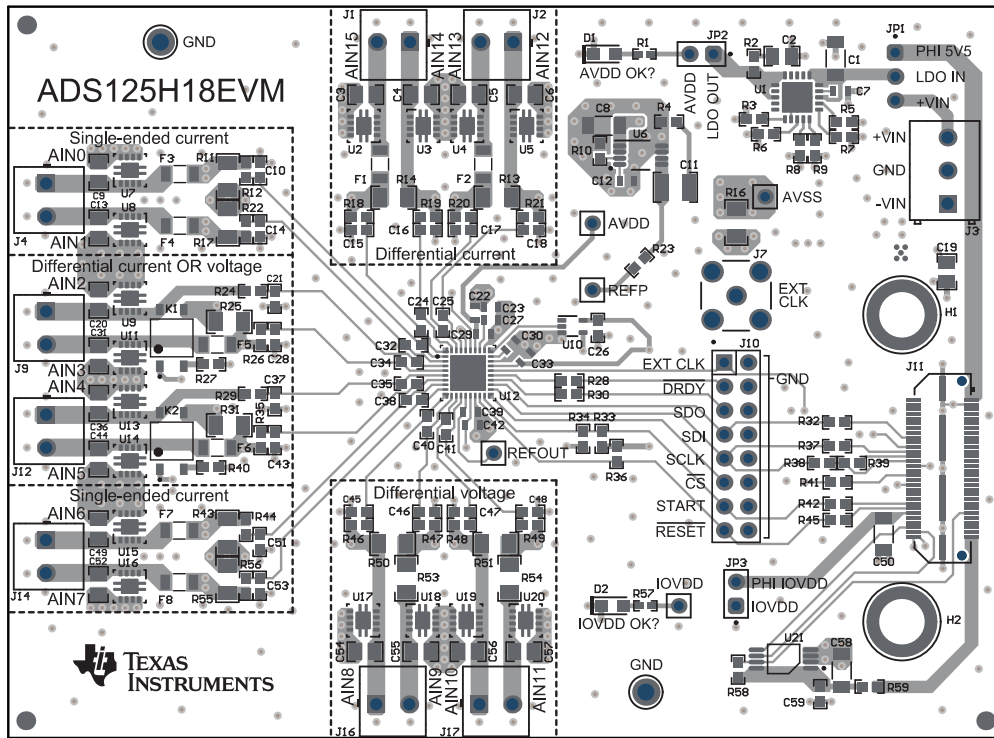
ADS125H18 EVM PCB Layout - Top Layer
